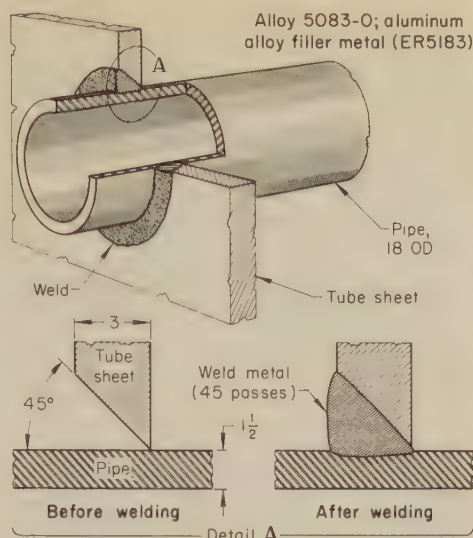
Leak-free joint between tube sheet and pipe in an aluminum feed-gas cooler
